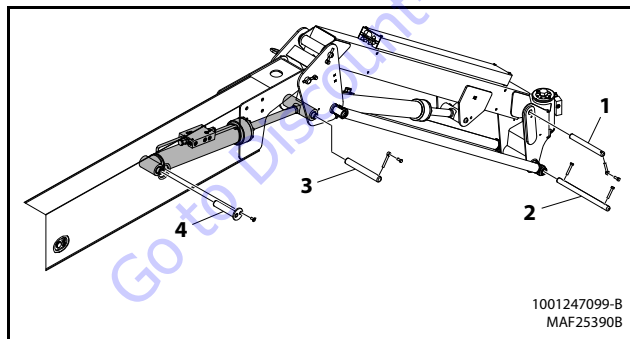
Removal/Installation of Components - Rotator and Platform Slave Level Cylinder
